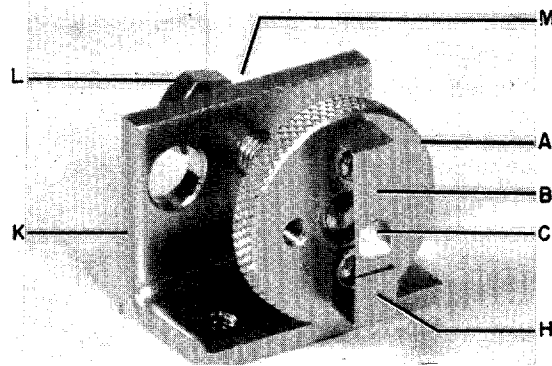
(8027689) Low Gradient Contact Assembly For The Directional Unit
